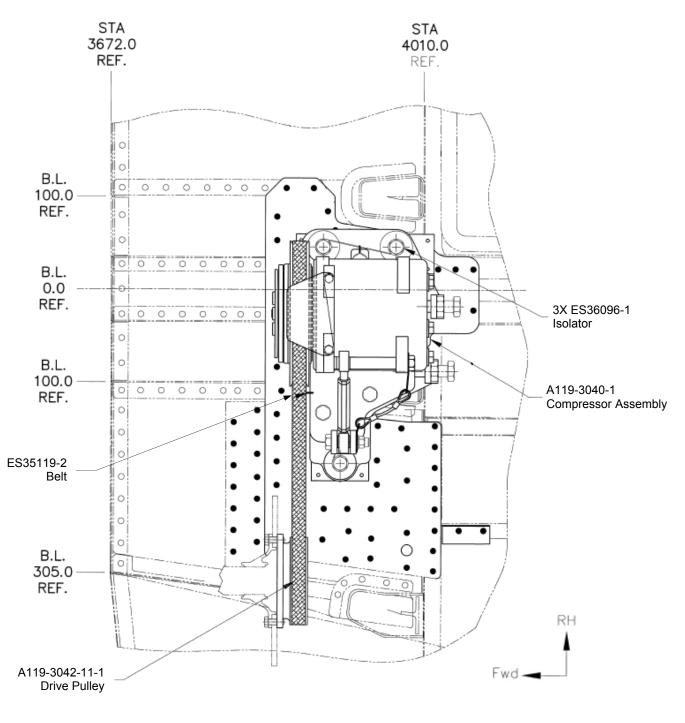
Compressor Installation (Engine Deck – View Looking Down)
